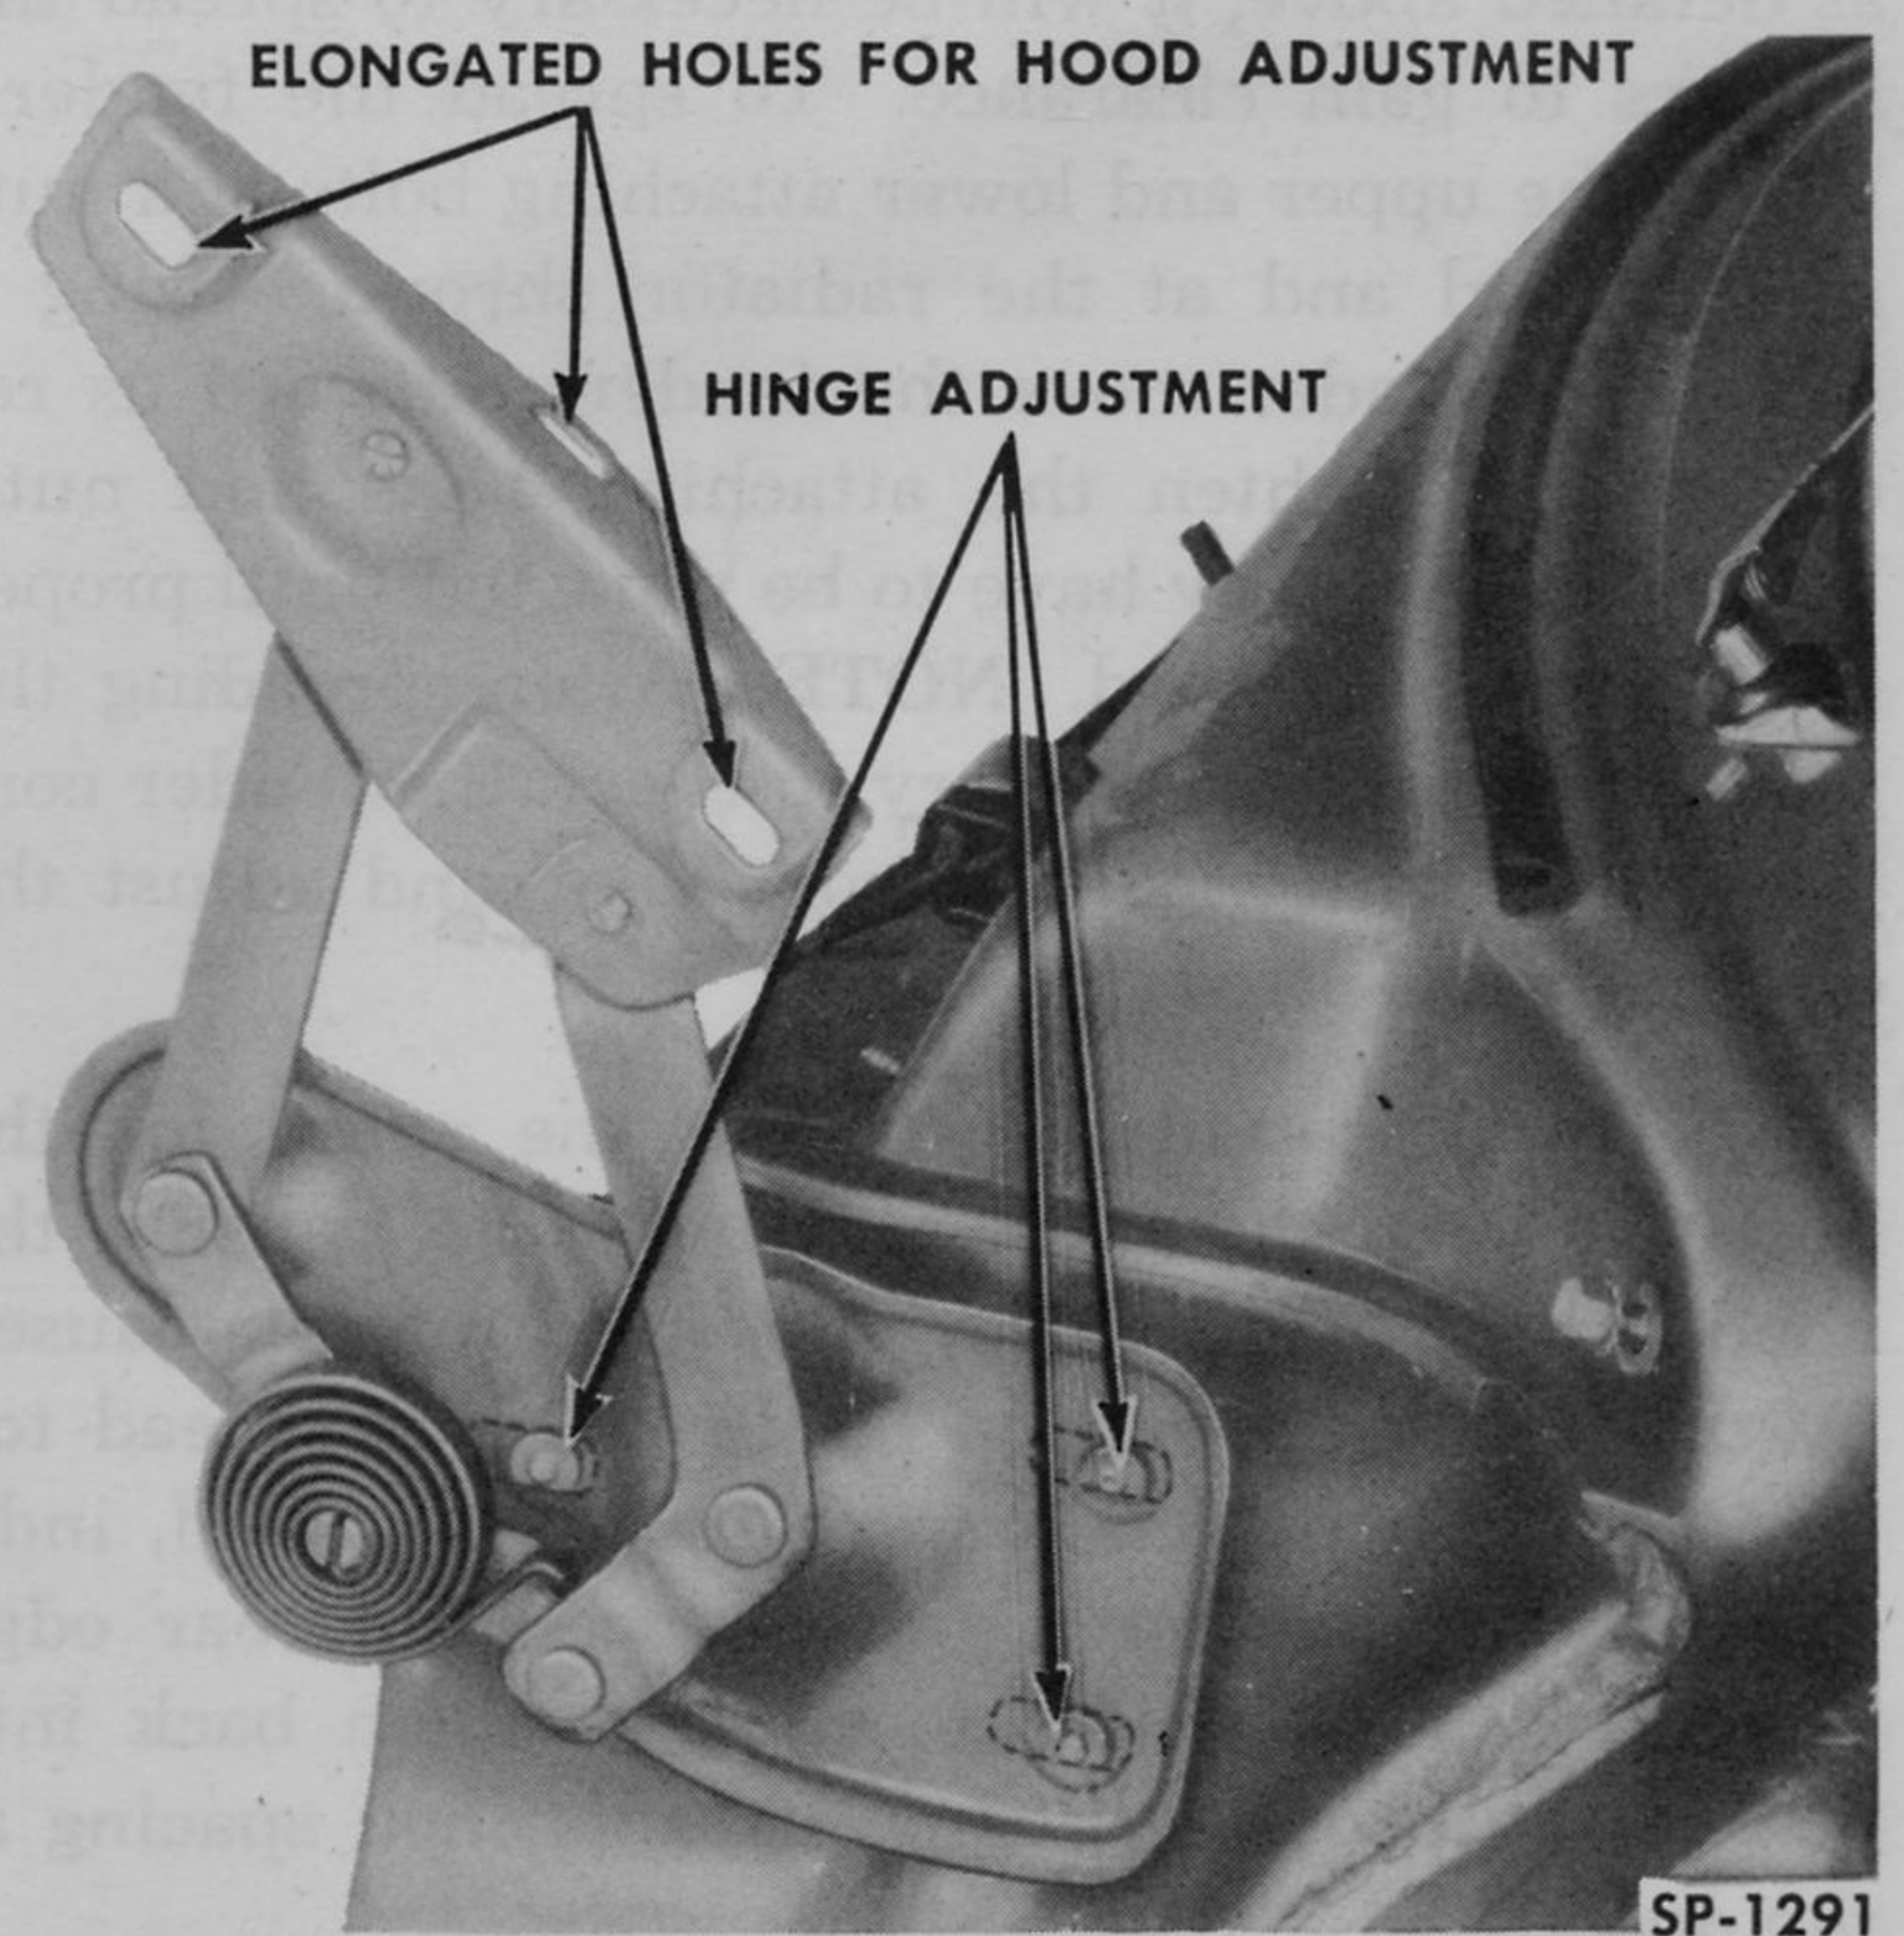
Hood Hinge Adjustment Points—Kaiser
